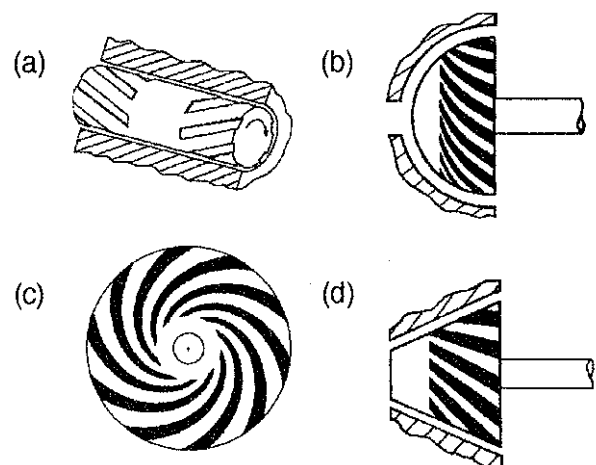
Spiral Groove Geometries (a) Journal, (b) Hemispherical, (c) Flatthrust, (d) Conical.
